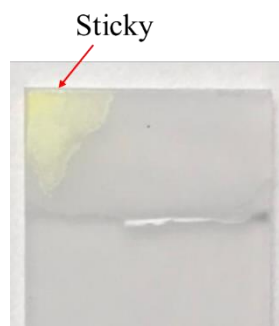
Photograph of fracture surface of peel test.
